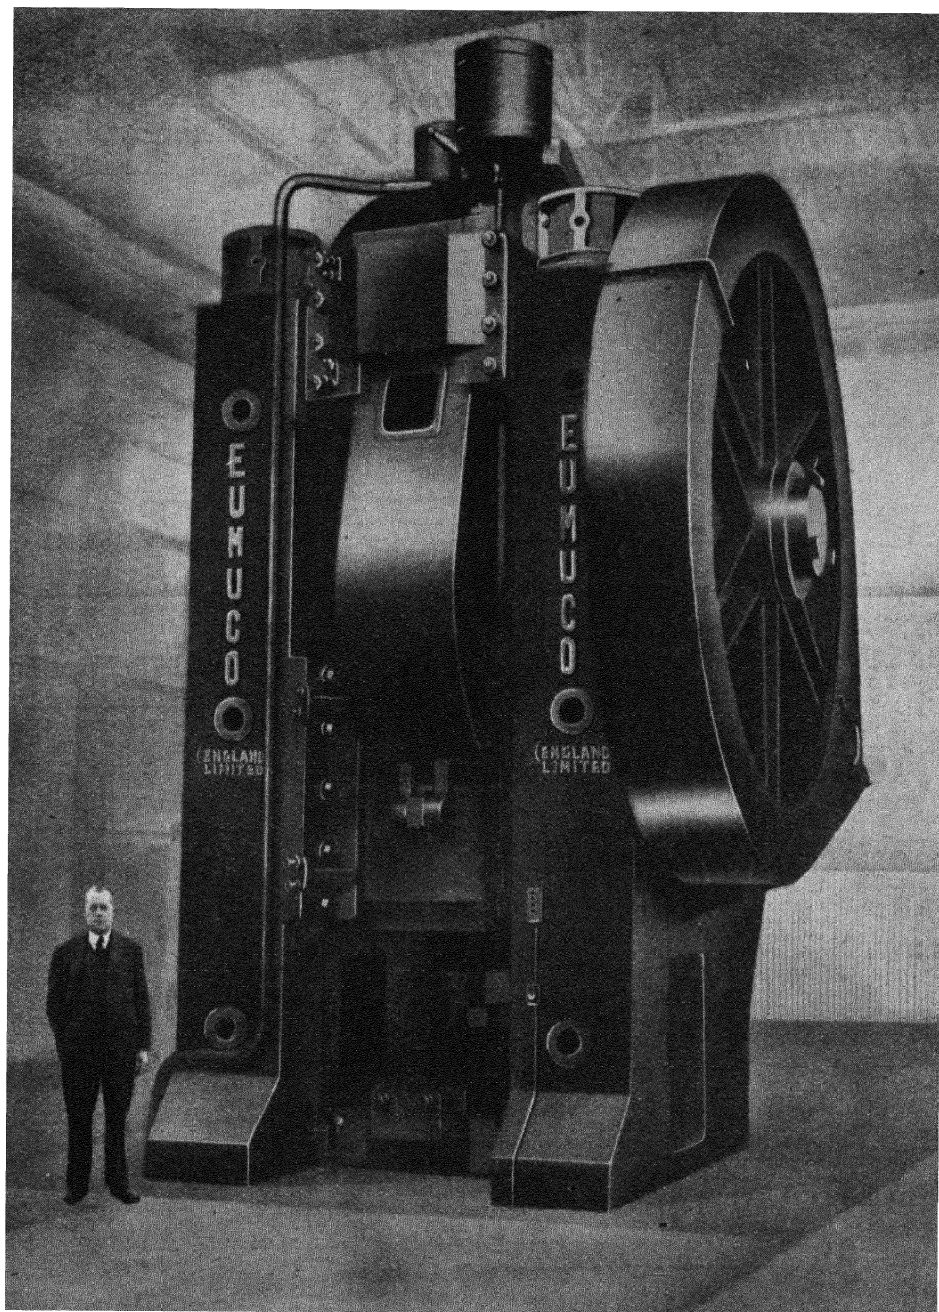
4,000-TON "MAXIMA" HIGH-SPEED PRECISION FORGING PRESS. THIS MACHINE IS ONE OF THE LARGEST MECHANICAL FORGING PRESSES EVER CONSTRUCTED
